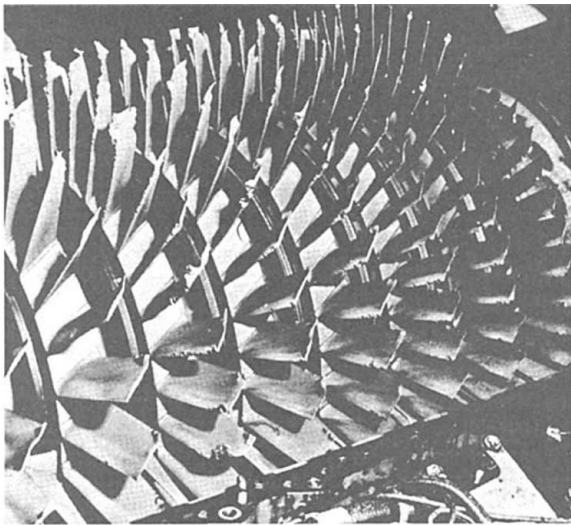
Compressor damage caused by pliers passing through compressor.
